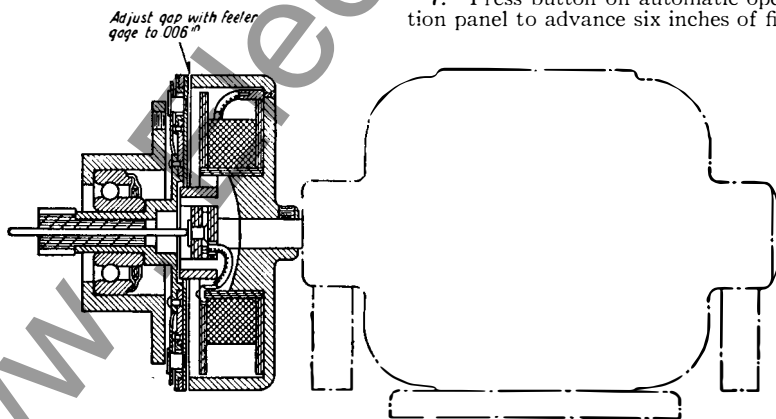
MAGNETIC CLUTCH OUTLINE.
